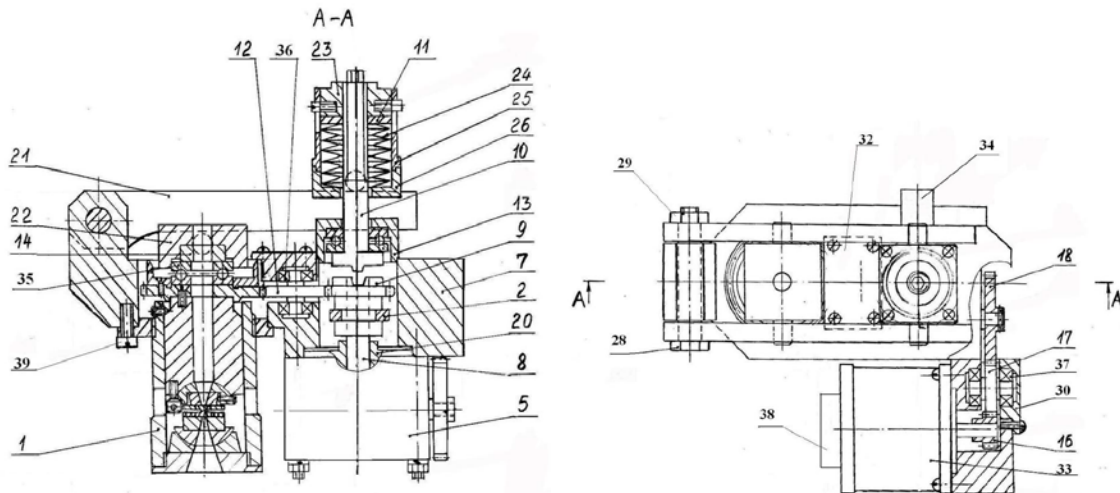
The RDAC with the automatic loading device. 1 – RDAC; 2 – elevator; 5 – reducer; 7 – frame; 8 – screw; 9 – moving half-coupling; 10 – half-coupling; 11 – washer; 12 – gear; 13 – becket; 14 – support; 16 – 18 - gear; 20 – bushing; 21 – second class arm; 22 – washer; 23 – nut; 24 – flat springs; 25 – cylinder; 26 – cartridge; 28 – spindle; 52 – step motor; 53 – servo; 56 – axial bearing; 57 – rotating angle optical sensor.
